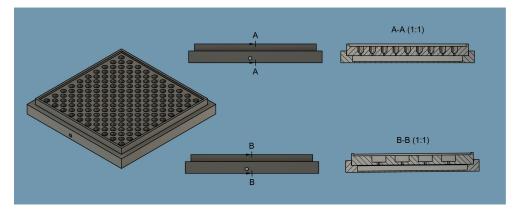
Brush cleaner outer brush mould. Two different patterns.
